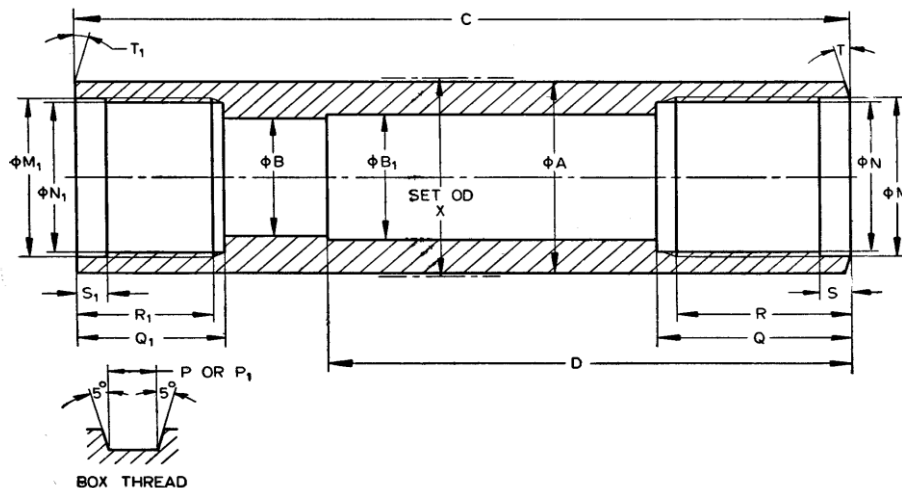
'WG' DESIGN SINGLE TUBE CORE BARREL — REAMING SHELL
